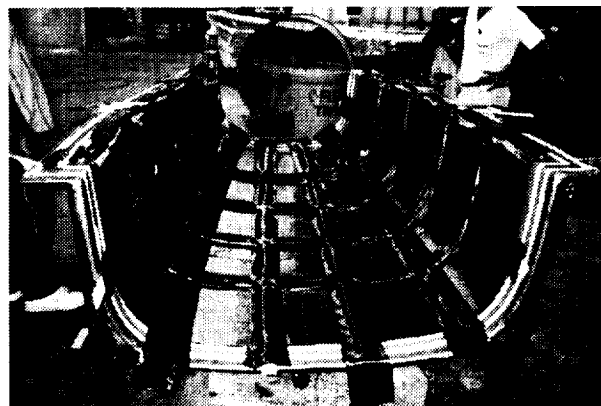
Vacuum assisted resin transfer molding tooling for fuselage section.
